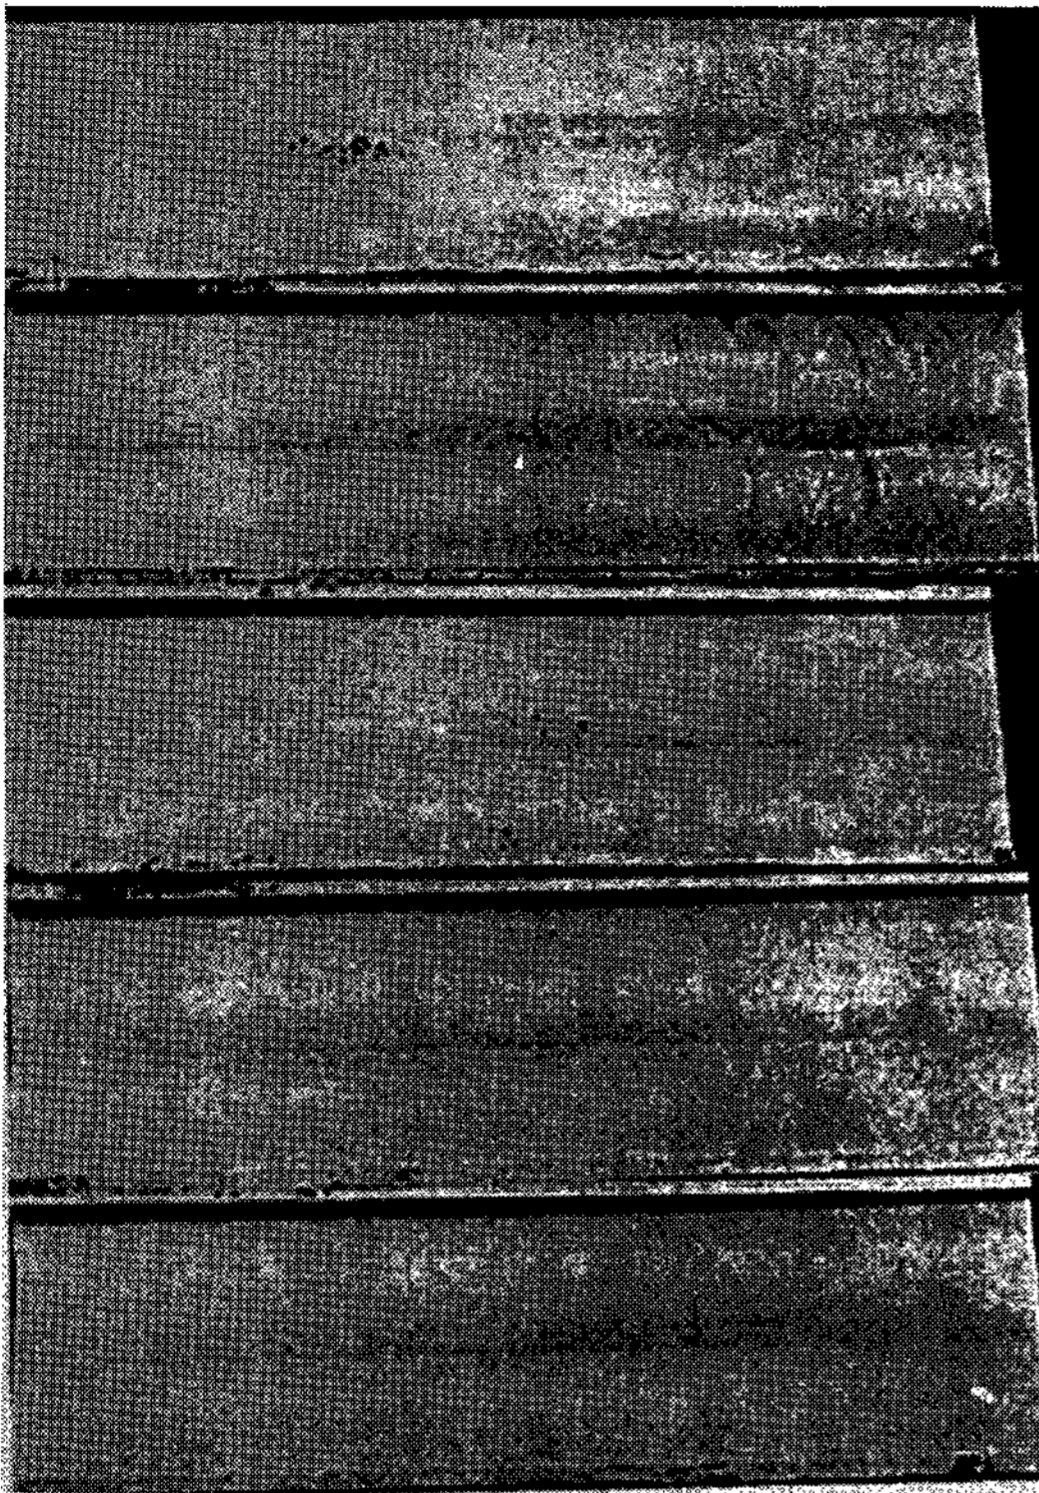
photograph of centerline shrinkage porosity of test castings with 3% padding taper produced consecutively : casting sequence from top to bottom.
